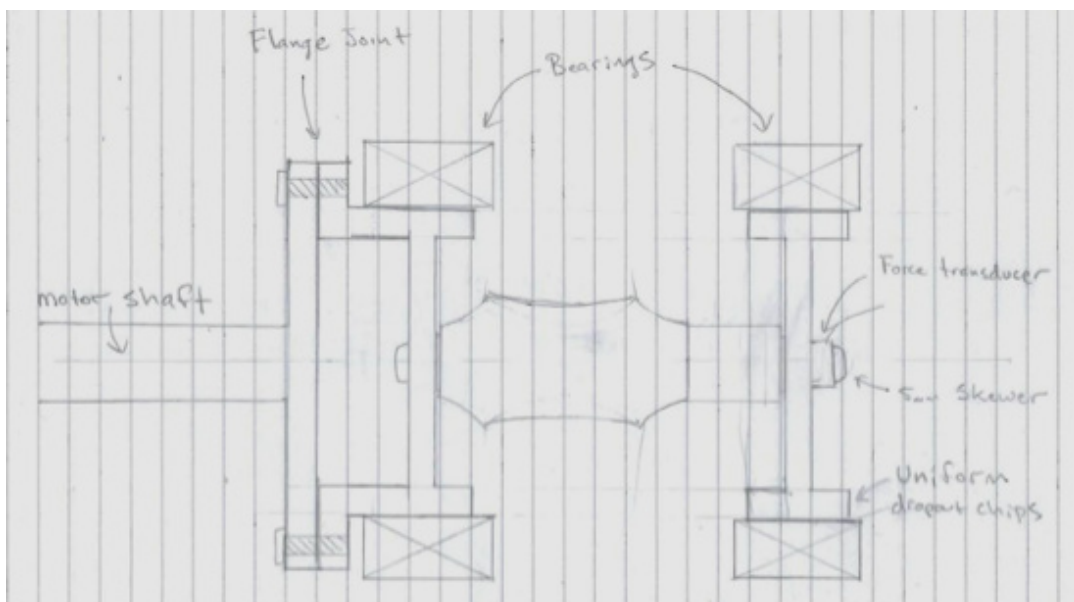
Motor shaft flange adapter connected to rotating dropouts.
